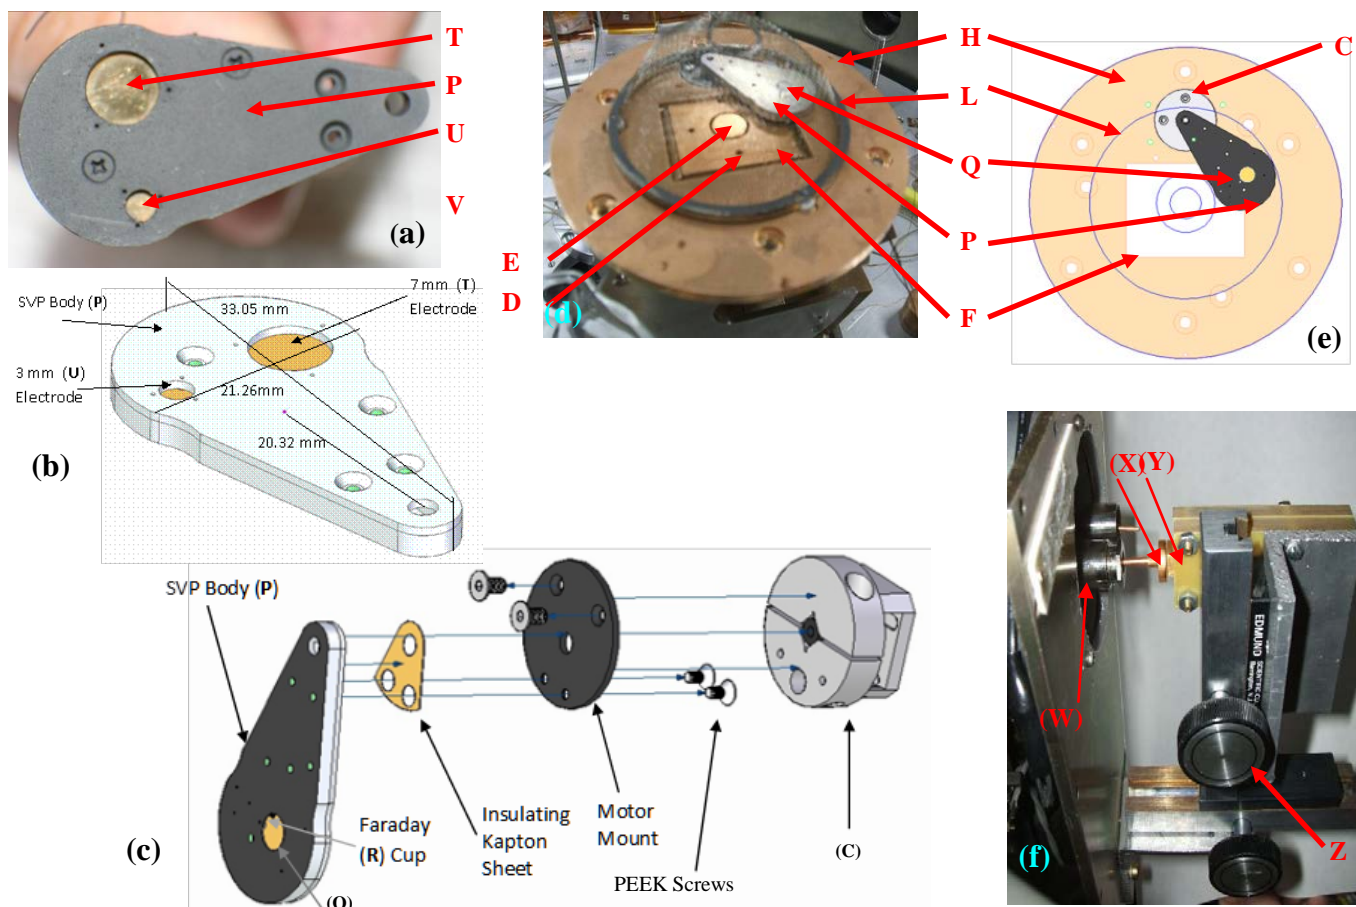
Surface Voltage Probe (SVP). (a) Photograph of sample side of SVP assembly. (b) Overall dimensions of SVP with center of gravity indicated. (c) Exploded view of SVP parts and SVP motor assembly. (d) Photograph of the SVP, mounted on the HGRFA, with the collecting hemisphere removed. (e) Diagram of HGRFA interior with SVP, looking toward the sample. (f) 6 axis EFP translation stage mounted parallel to a witness plate.
